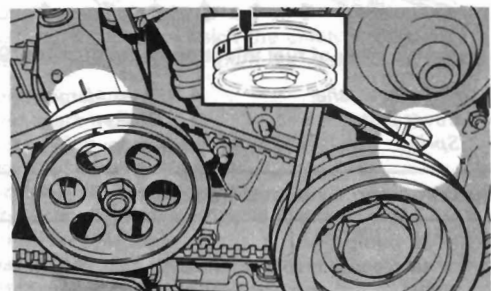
Fuel injection pump correctly timed (Sec 27)
